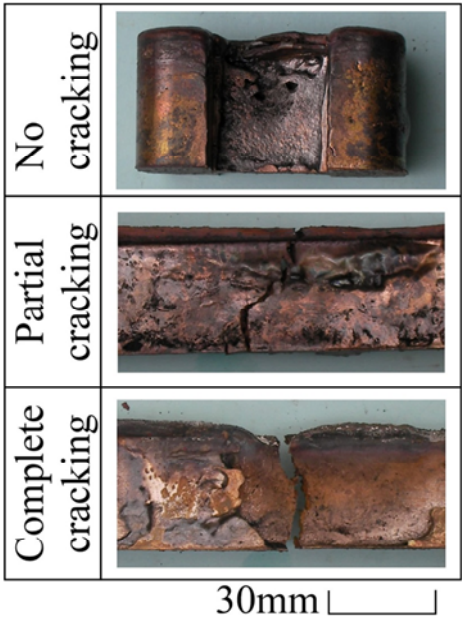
The appearance of various Cu alloy castings on the permanent mold for the solidification cracking test.
